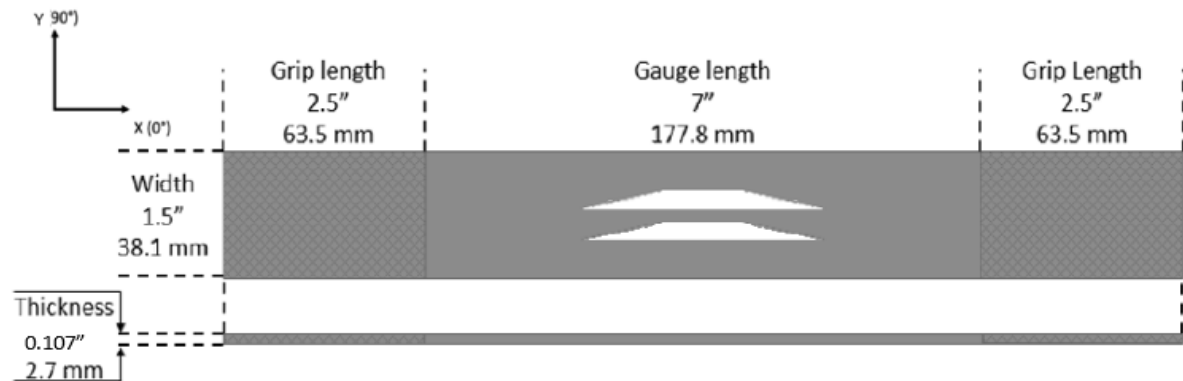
Dimensions for 0° coupons and defect-free coupons
